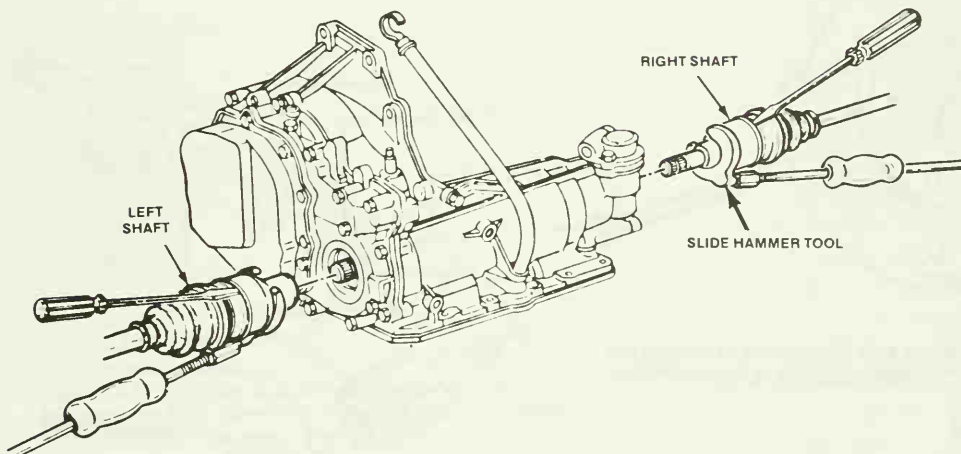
A slide hammer pulling tool is used to pull the axles out of the transaxle. (Pontiac Motor Division of General Motors Corporation)
